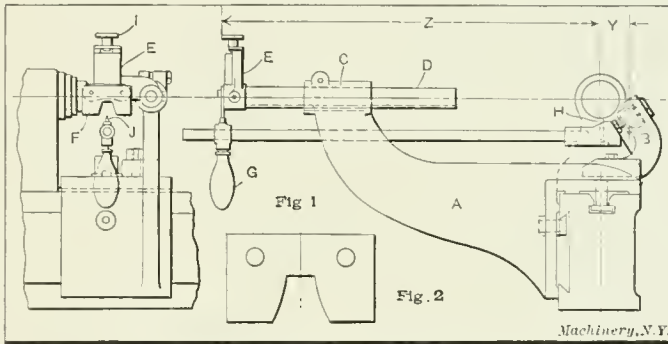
Lathe Attachment for Turning Circular Form Tools. Fig. 2. Templet or Master Former used on the Attachment
